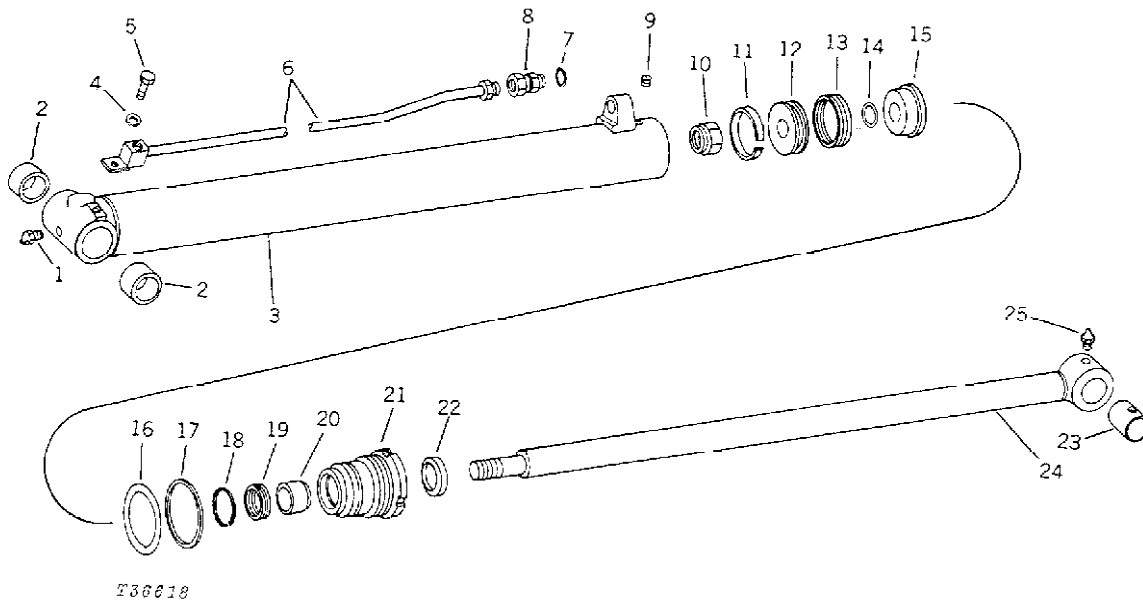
Backhoe Boom Cylinder Assembly
